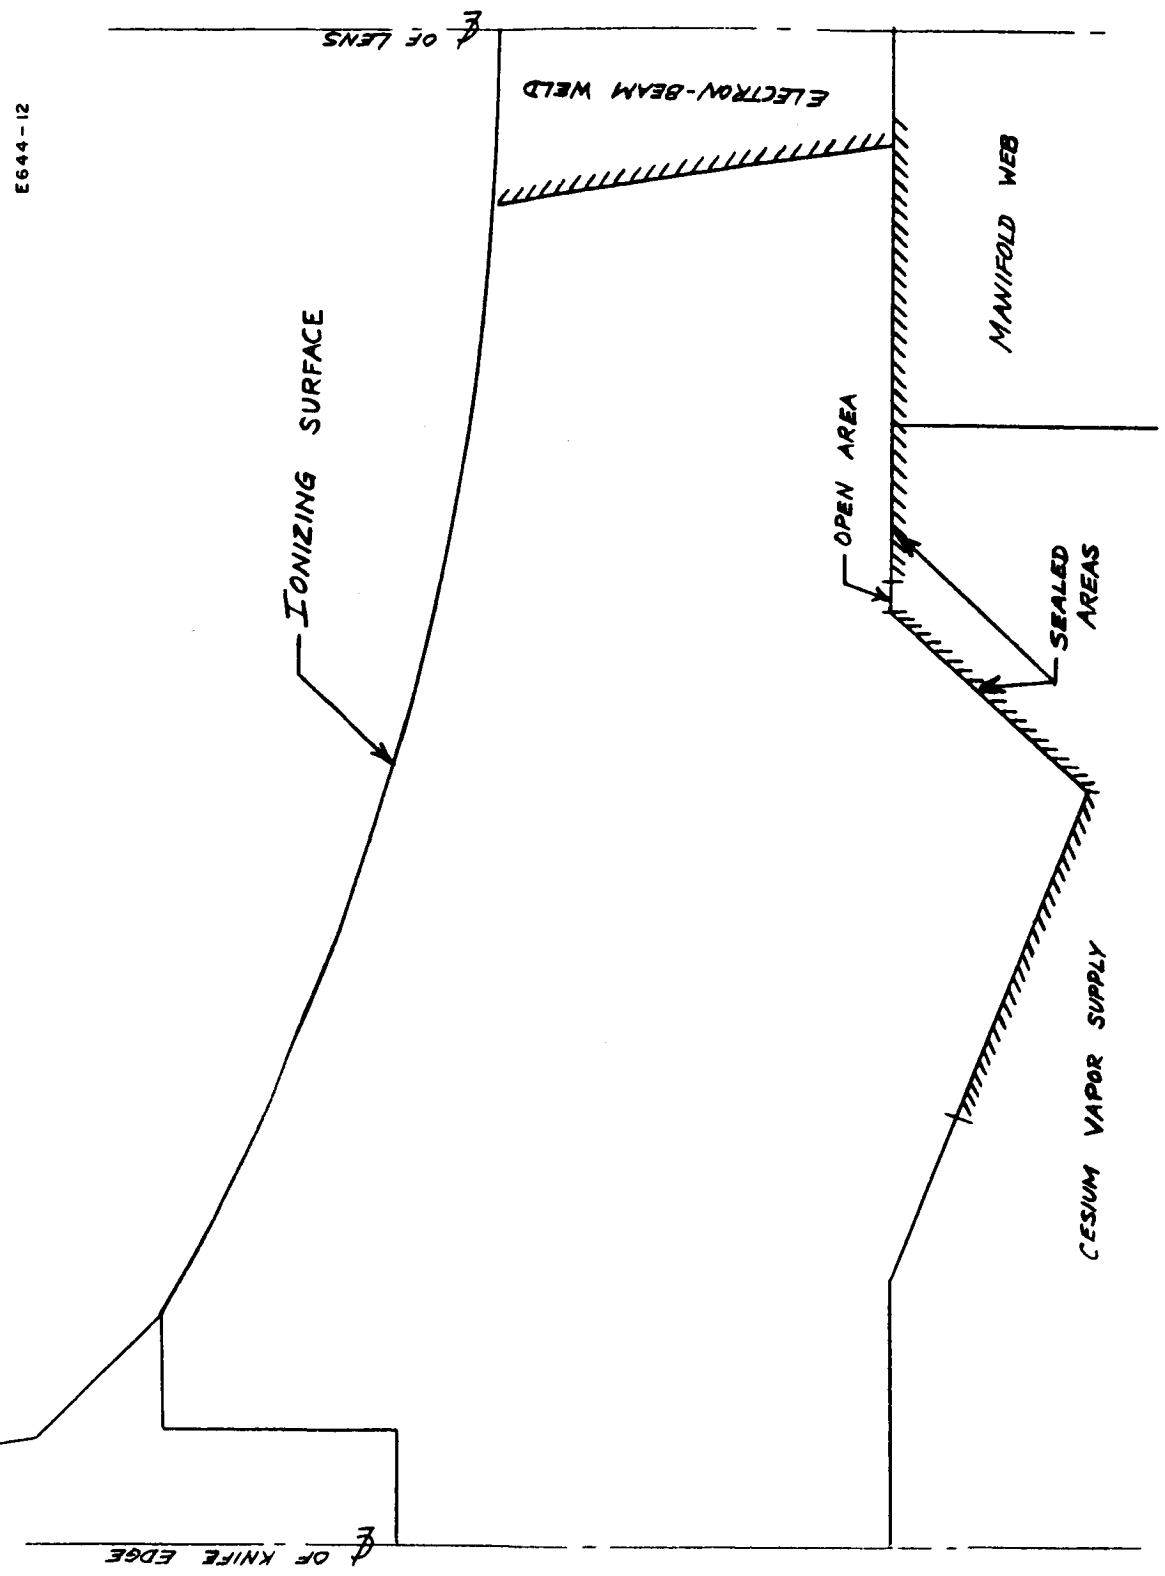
Ionizer with thickness reduced for electron-beam welding but with flow adjusted for integral-focus optics.
